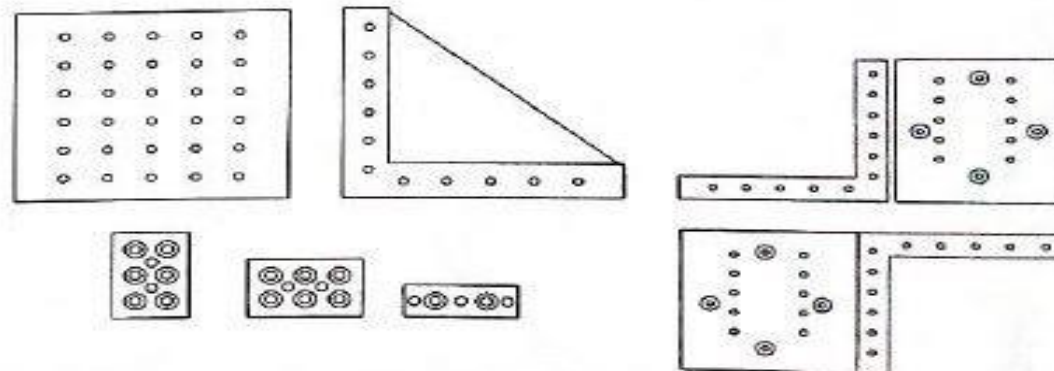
Modular fixture elements used for supporting complex workpieces
